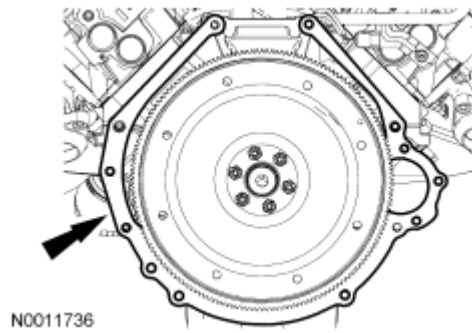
Locating Engine-To-Transmission Spacer Plate
